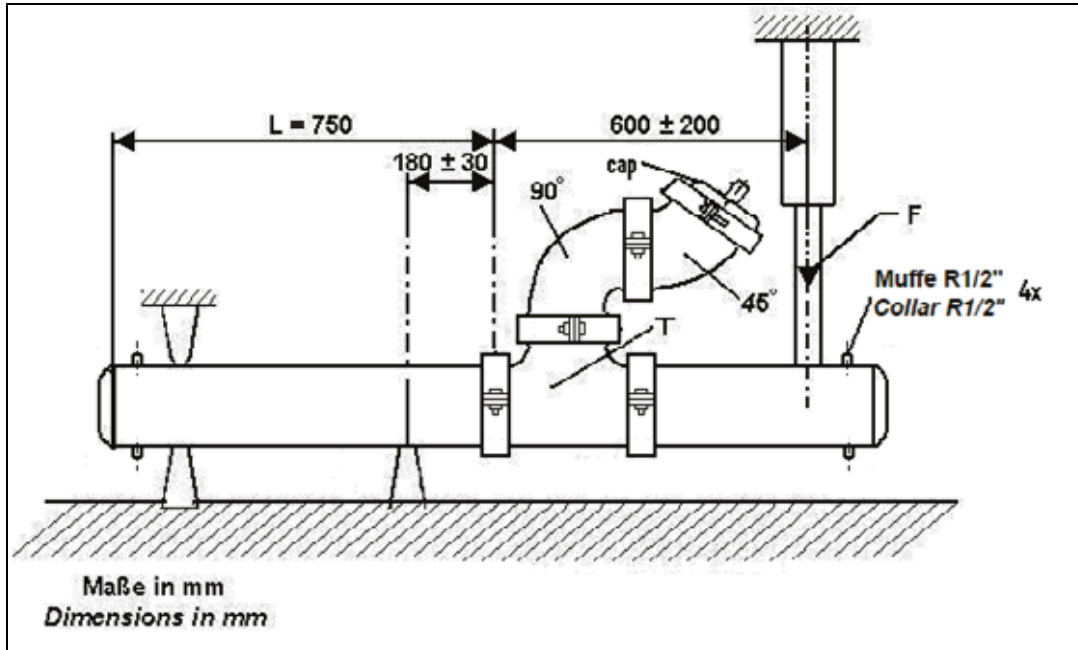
Test sample assembly for pipe fittings – 90° bend
